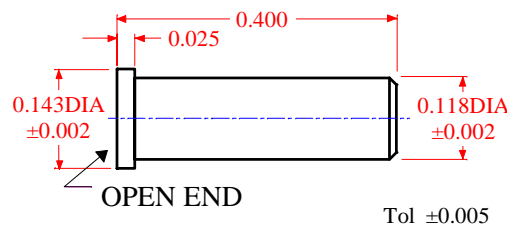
RO Socket # 9748/ 9748LF Mechanical Dimensions
